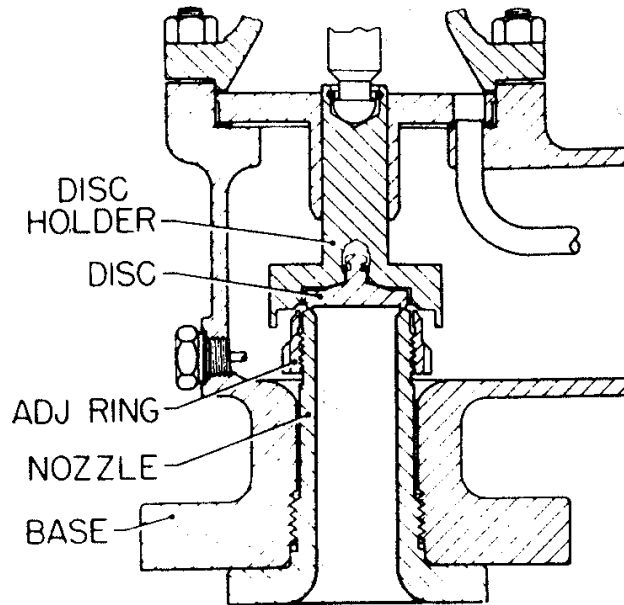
Metal-to-metal seats must be machined precisely and aligned accurately to seal properly.
